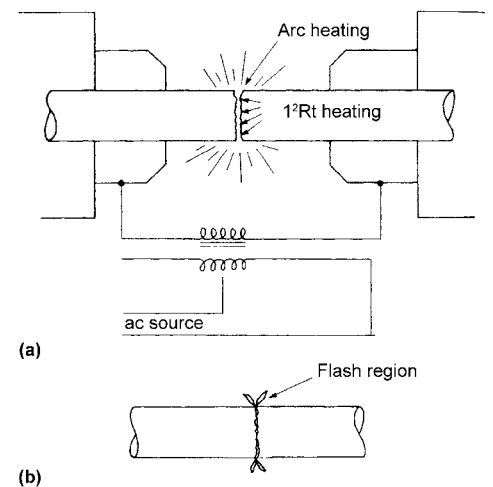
Schematic illustration of (a) the flash welding process and (b) a typical as-welded flash weld. Source: Ref 2
